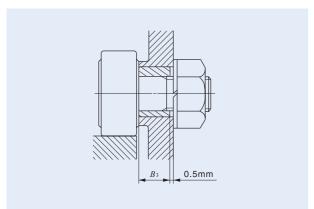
Length of the mounting hole of Eccentric Type Cam Follower
